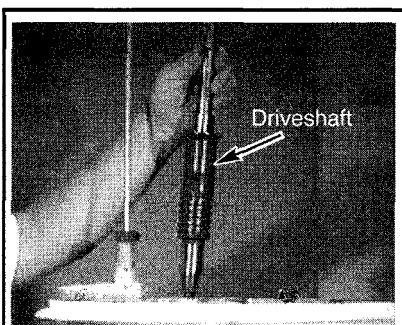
The driveshaft can be installed with or without first installing the thrust bearing and bearing housing assembly...
